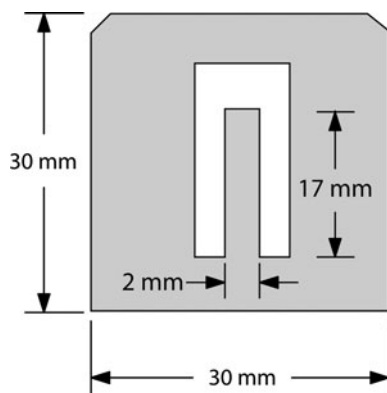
Schematic of cantilever beam geometry used for post-deposition stress measurement. Only one side of the center tongue is plated
